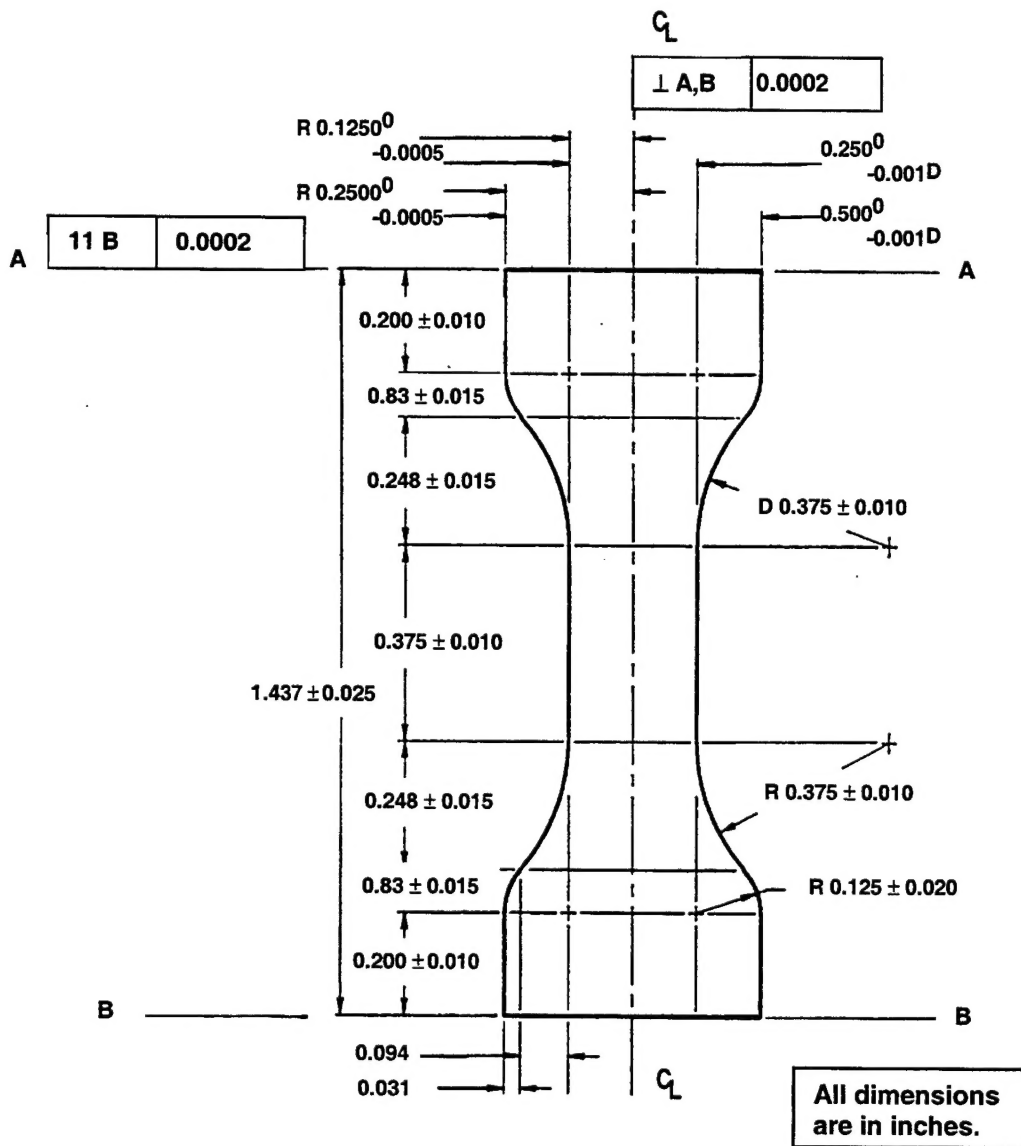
Large Dumbbell-Shaped Compression Specimen
